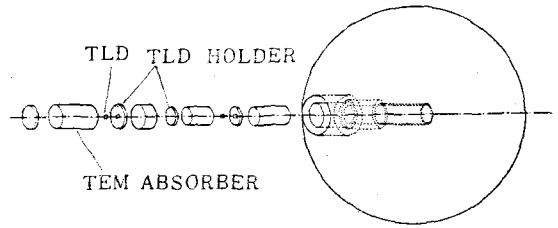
Exploded view of Detector Holder and Absorber Assemblies.
